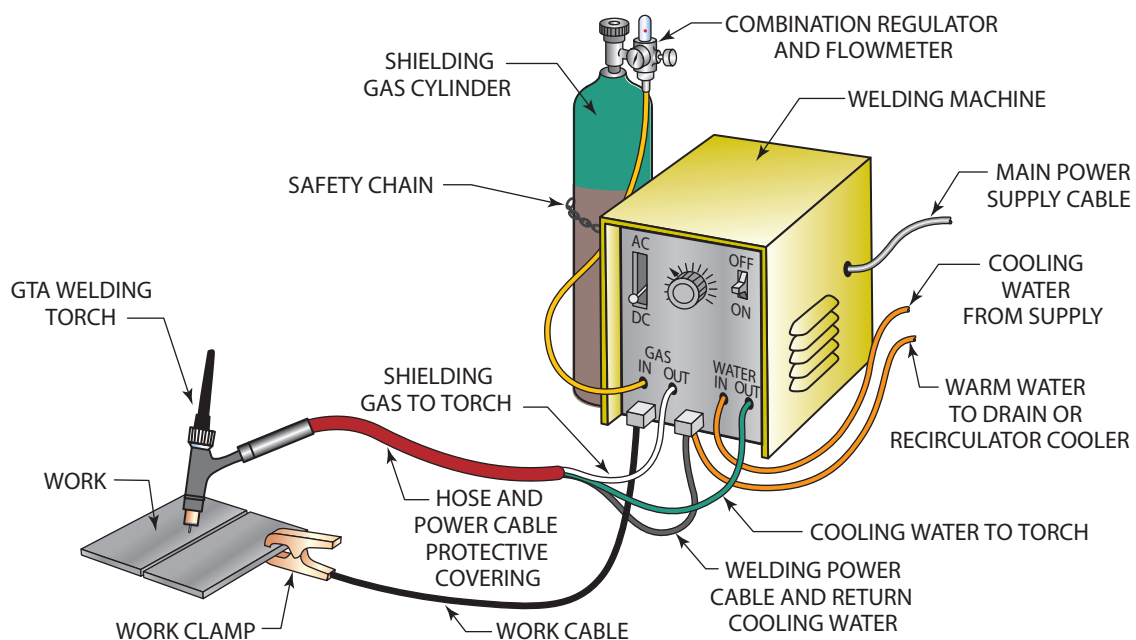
Gas tungsten arc welding equipment.
